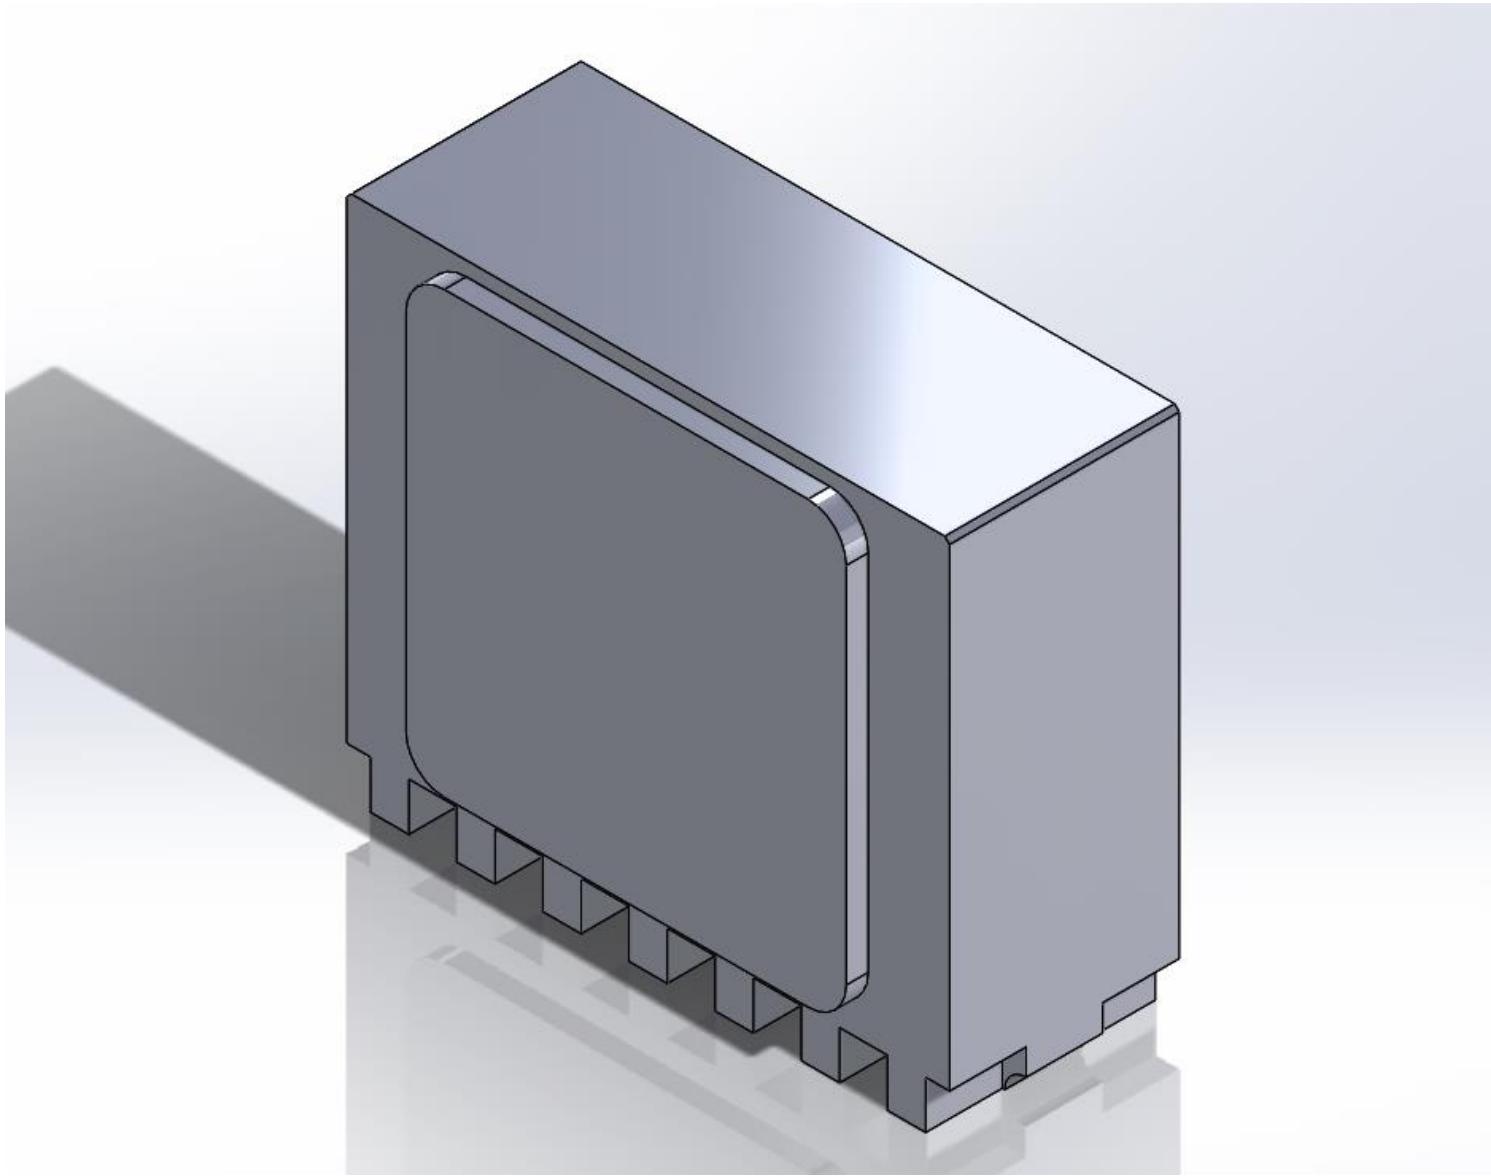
Part 1001 (Precision Navigation and Pointing Gyroscope) CAD Drawing
